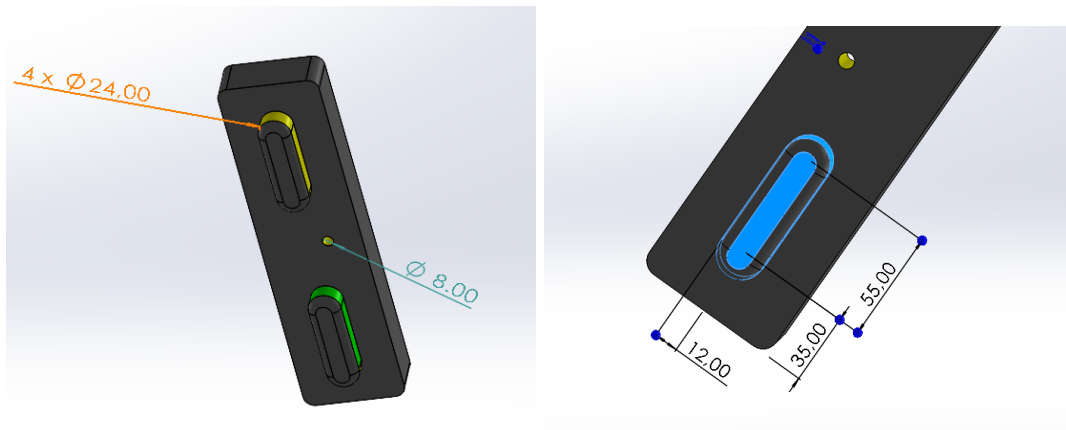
Dimensions in mm of the top POM casting on the movable stairs, seen from bottom.
